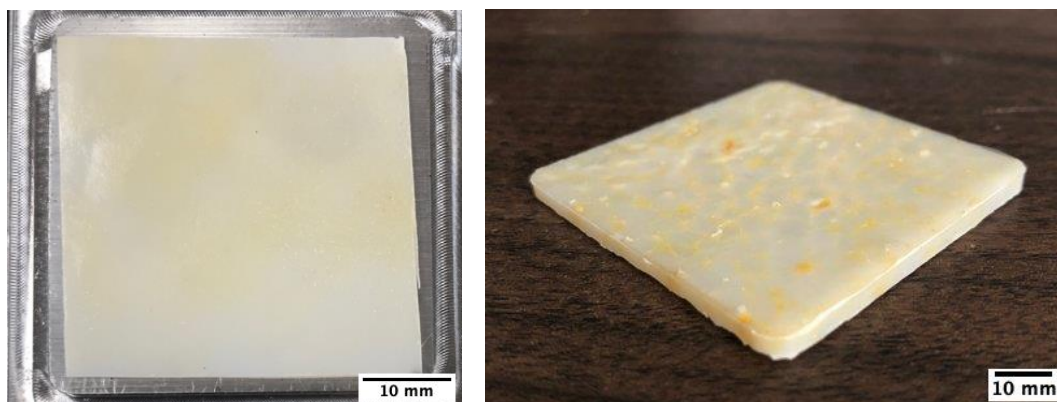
HIPS sheet made via solvent casting and finished specimen after compression molding
